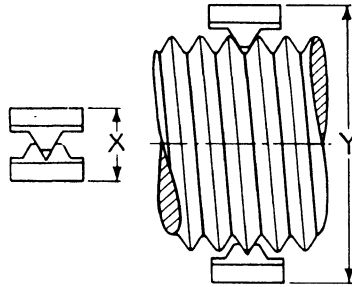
THE TWO ESSENTIAL DIMENSIONS WHEN THREAD-MEASURING PARALLELS ARE USED. $D_p = Y - X$.
